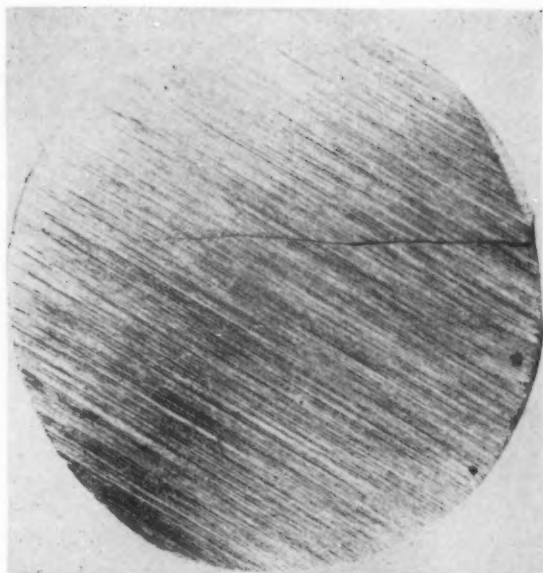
A CYLINDER OF HIGH CARBON TOOL STEEL 2-IN. DIA. x $6\frac{1}{2}$ -IN. LONG, CRACKED IN QUENCHING. SPECIMEN WAS PLACED BETWEEN COPPER PLATES AND 500 AMPERES PASSED THROUGH IT WITH A WELDING MACHINE.
